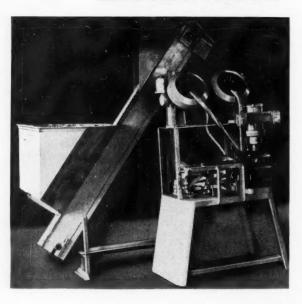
This particular setup provides for the automatic insertion of spring-rivet assemblies in the cavities of clutch plates, of the type shown in Fig. 1, at a production rate of 300 plates per hour.
